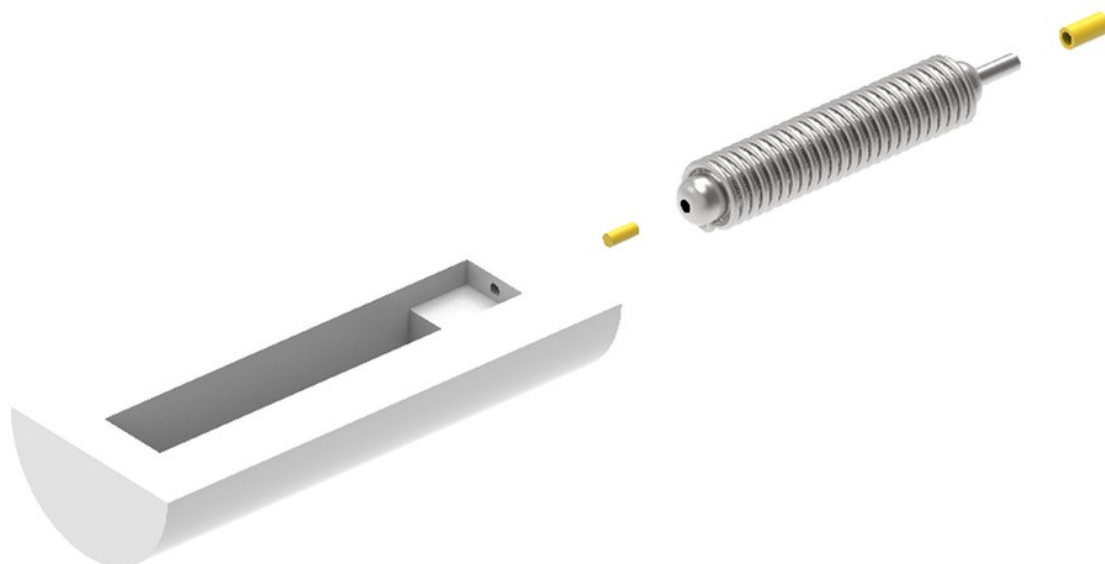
Exploded CAD model of the medium spinneret.
